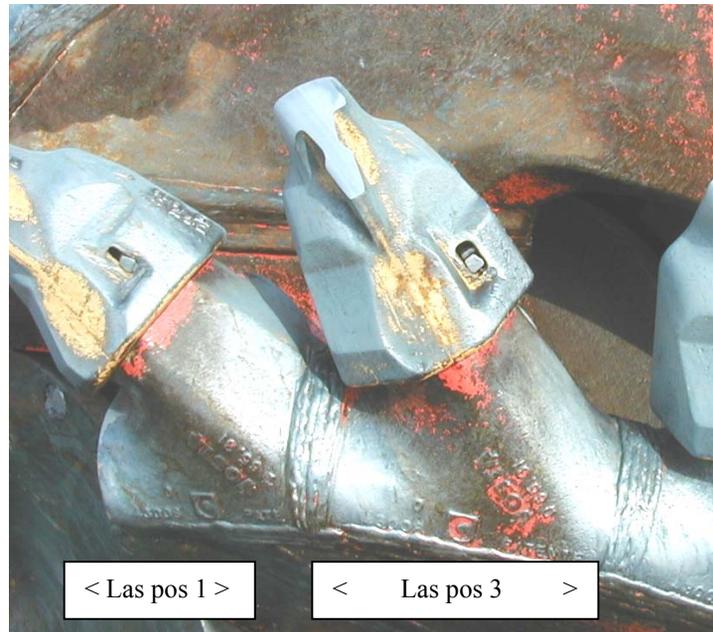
Showing relative short weld of the top adapter on a conventional cutterhead (left).
